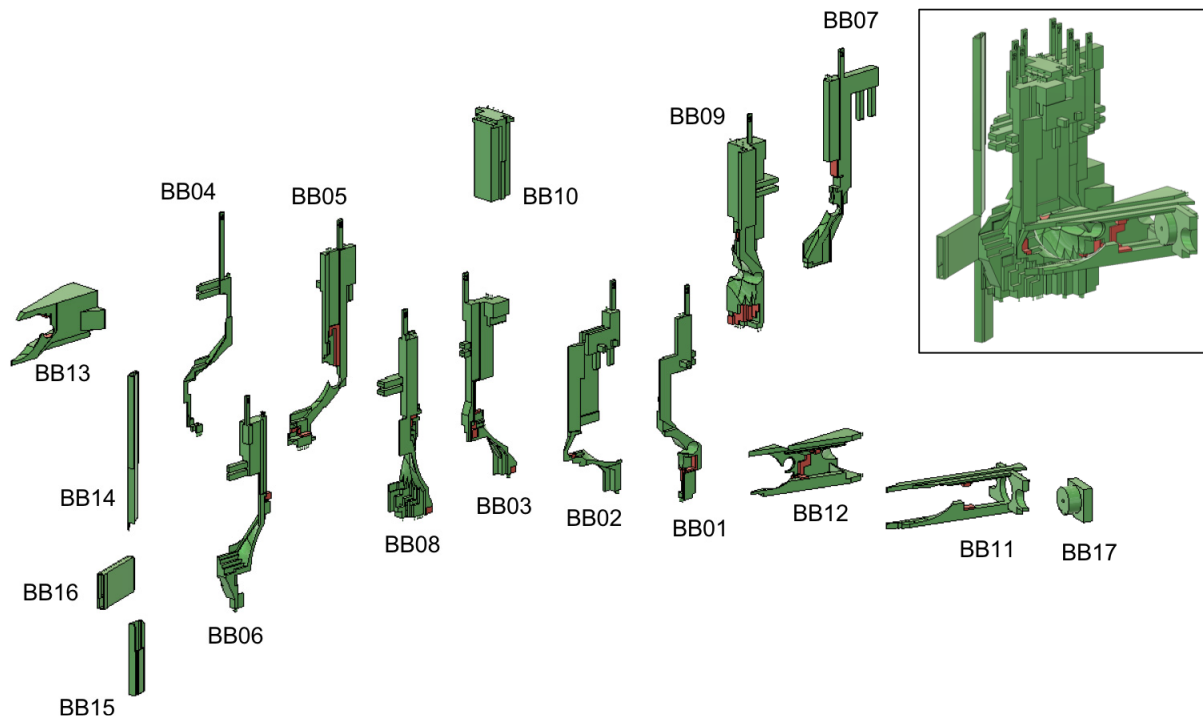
Exploded view of the BB cartridges in a 1/10 section. Assembled view is shown in the box at the upper right-top.
